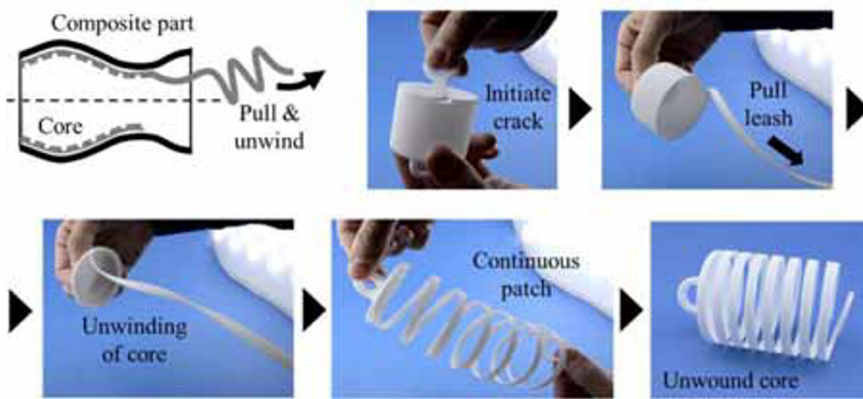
Disassembly and breaking of SLS-made polyamide core by initiating crack and pulling leash to propagate crack along spiral-shaped breaking line and unwind core as a flexible patch.
